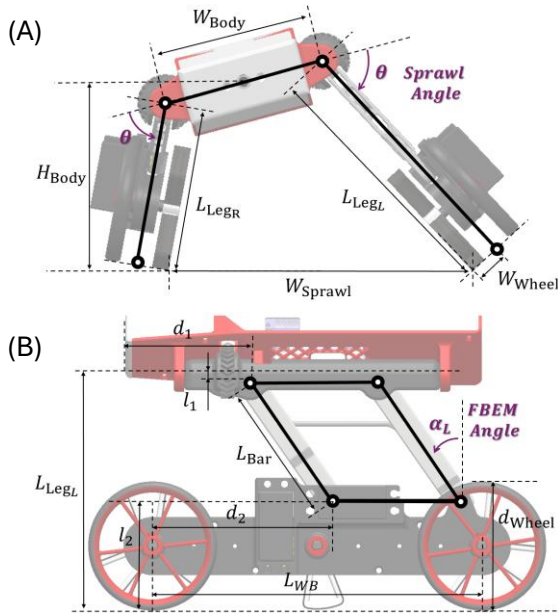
The mechanical design of the DSTAR robot. (A) Front view showing the sprawling mechanism. (B) Side view showing the left FBEM.
